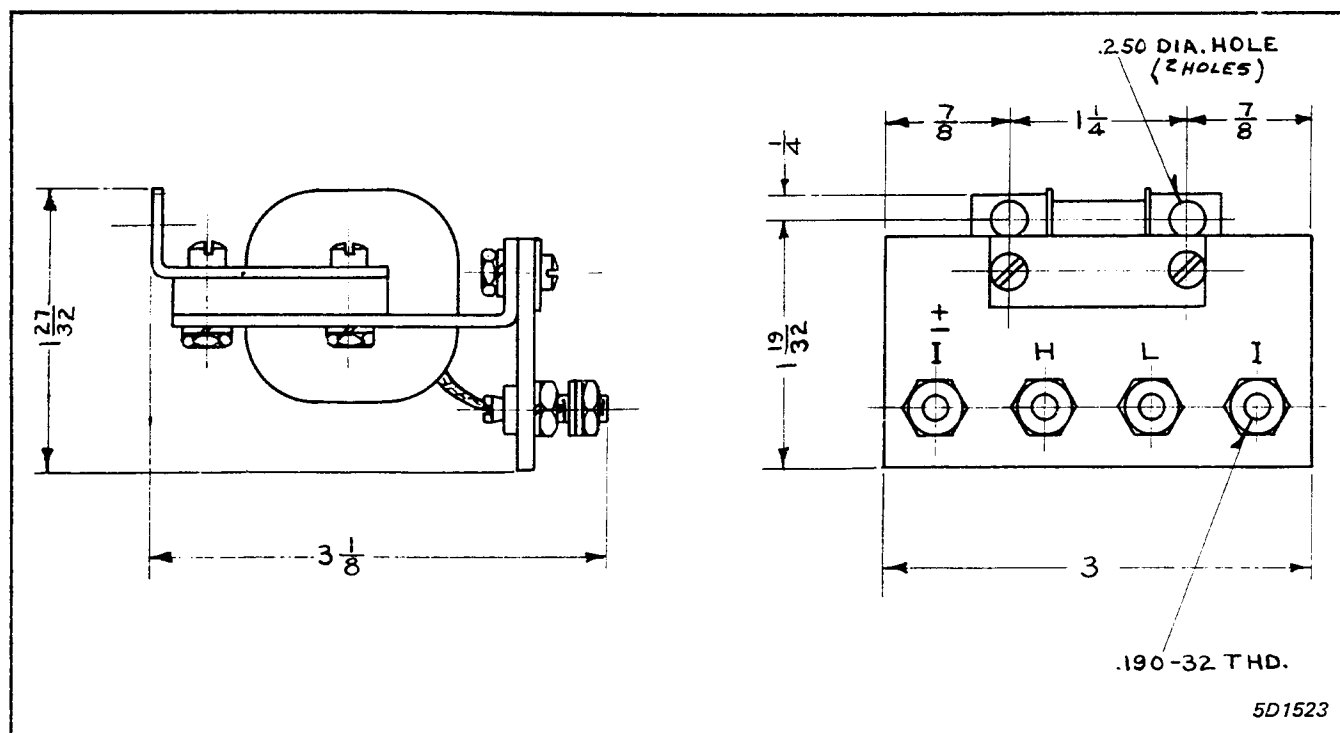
Outline of the Test Milliammeter Auxiliary Transformer.
